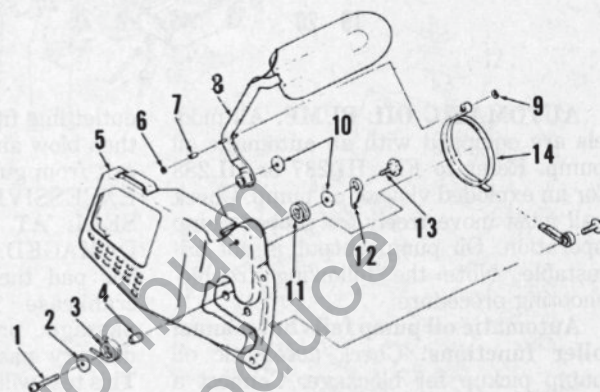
Exploded view of chain brake used on Model 550SL.
